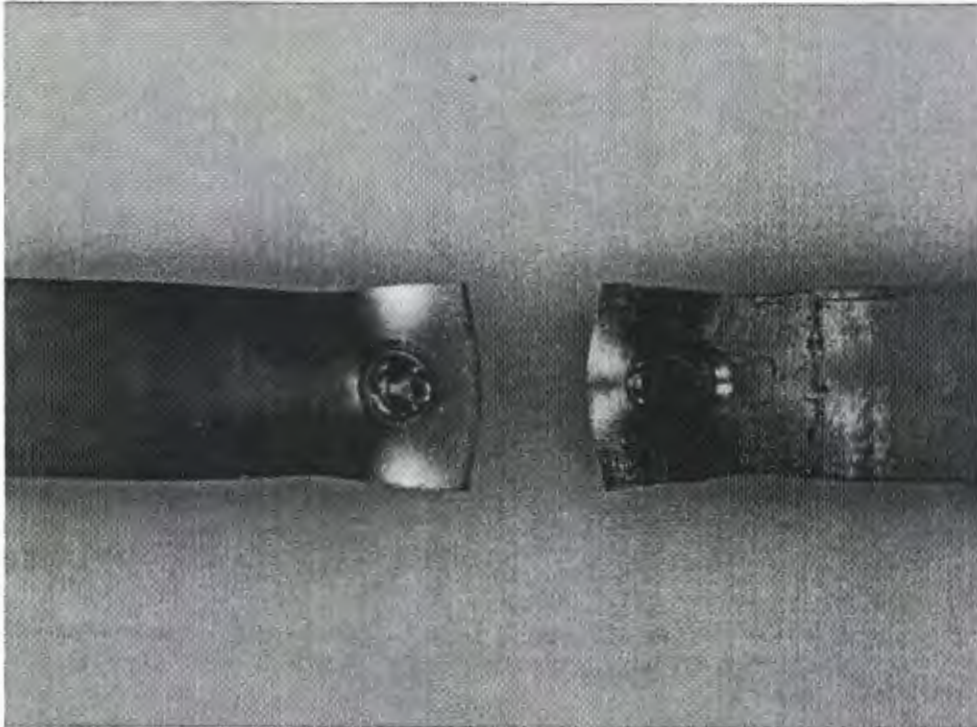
"Nugget formation" failure of an improved spot weld tensile shear specimen; magnified 1x.
